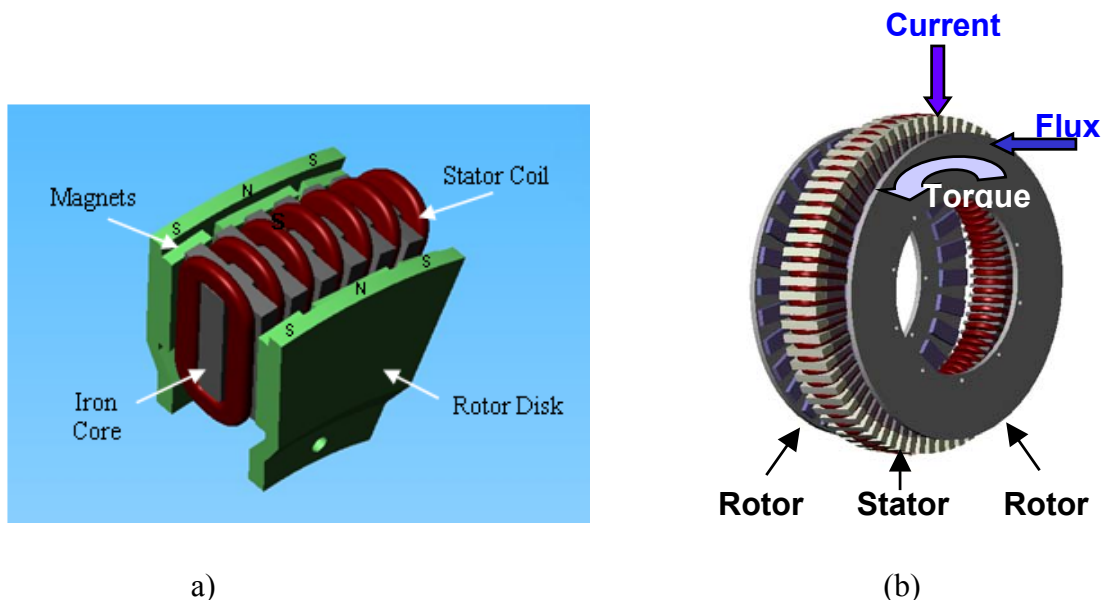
Axial flux permanent magnet machine topology selected for the GM's wheel hub motors:
